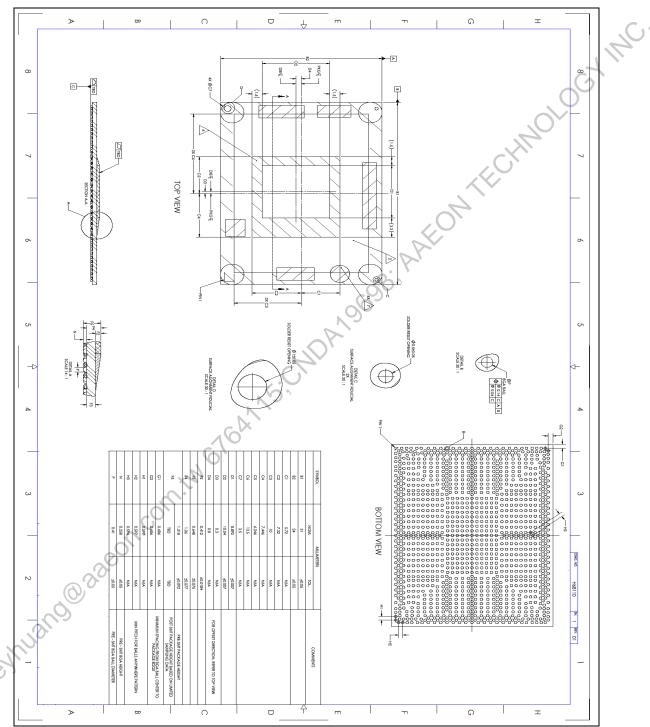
Package Mechanical Drawing—Part 2 of 3
